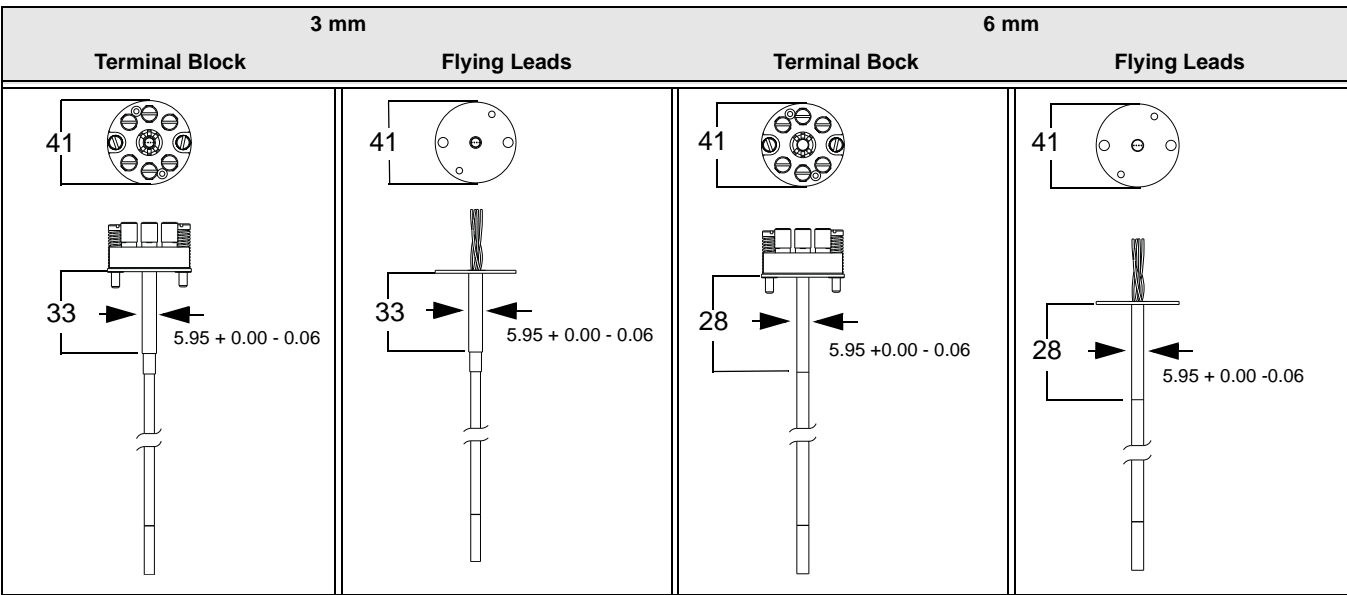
Rosemount 1067 RTD and Thermocouple Dimensional Drawings (All dimensions in mm)
